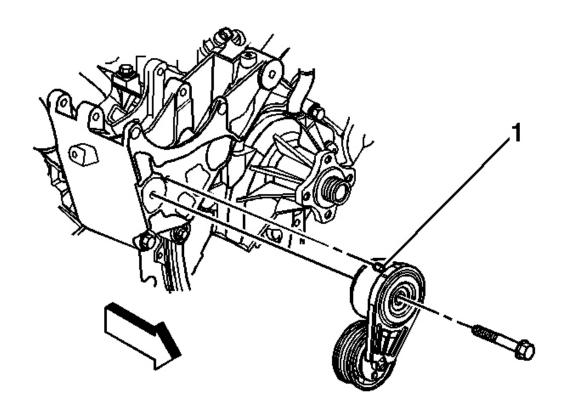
Drive Belt Tensioner Locating Pin Courtesy of GENERAL MOTORS CORP.
